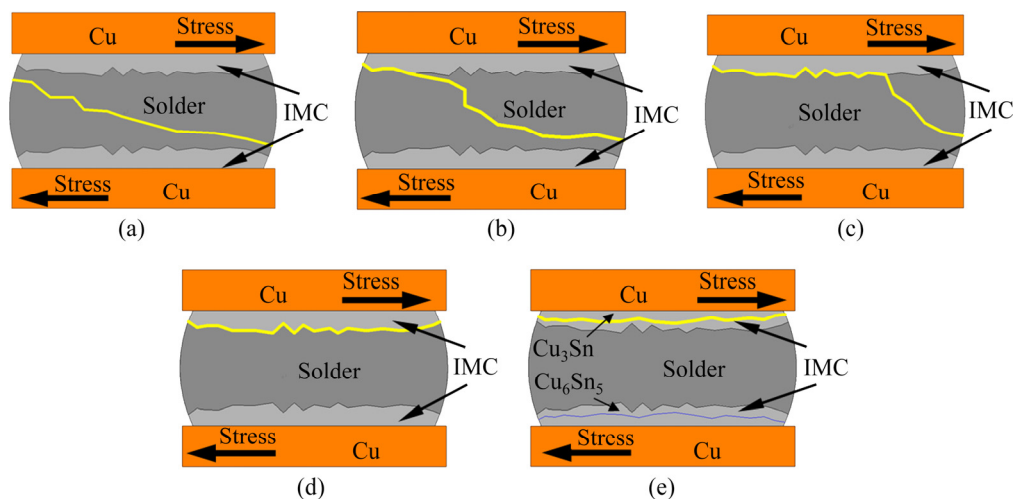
Transition of fracture mechanism of solder joints: (a) Ductile fracture; (b) Quasi-ductile fracture; (c) Quasi-brittle fracture; (d) Brittle fracture of Cu_6Sn_5 ; (e) Brittle fracture of Cu_3Sn
